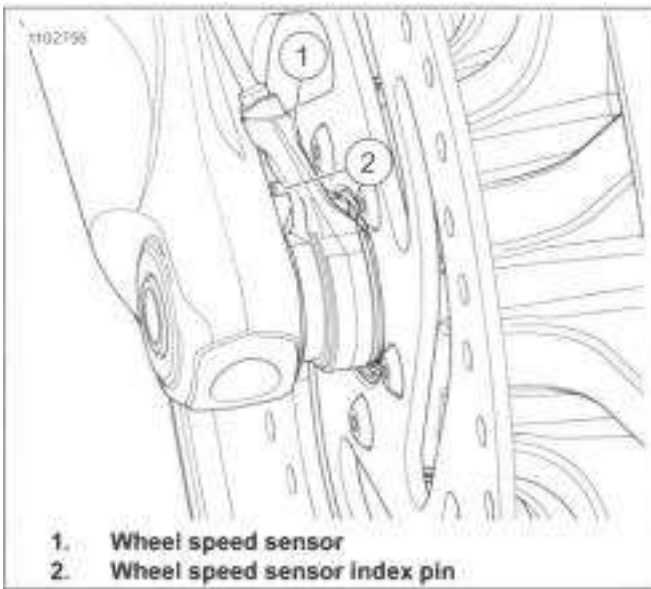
Front Wheel Speed Sensor Index Pin (ABS equipped)
